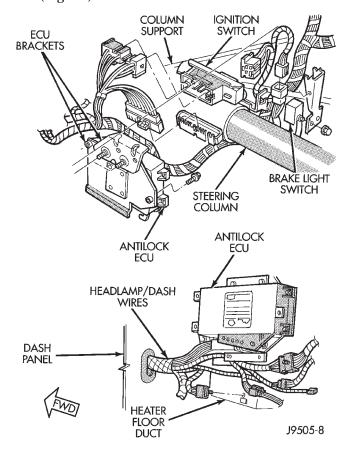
Antilock ECU Mounting (Left Hand Drive XJ)
